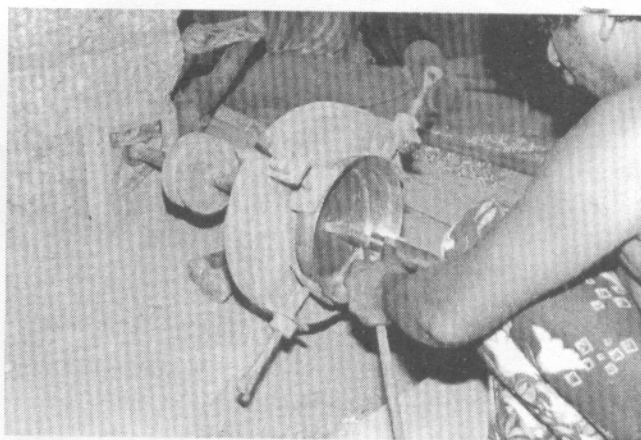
Making inner rings as decoration on polished high-tin bronze bowl in Payangadi, Kerala using a hand-turned lathe
